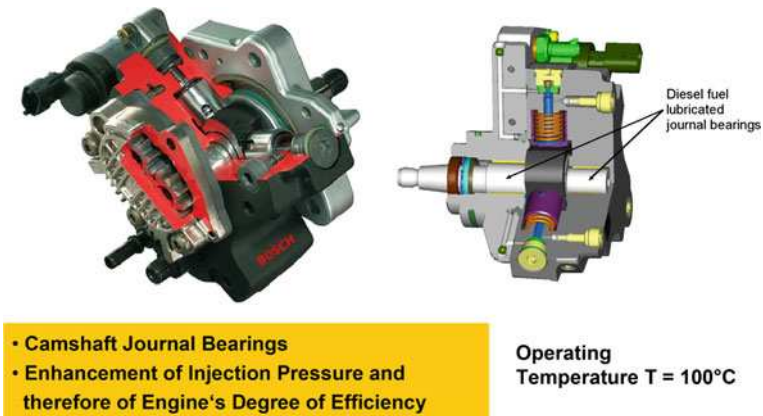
Camshaft journal bearings in a diesel fuel injection pump (*upper left*: view into a real pump; *upper right*: schematic, three dimensional drawing of the bearings' position); Courtesy of Robert Bosch GmbH, Stuttgart, Germany (modified)
